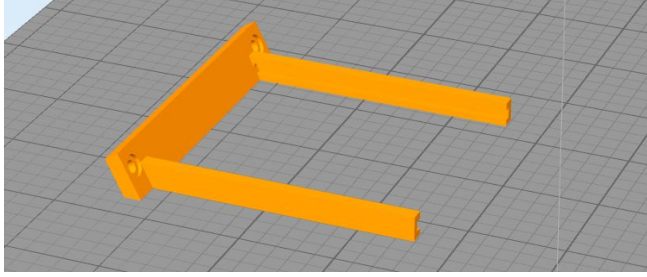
3D printed K64 mount that holds the K64 and motor shield assembly to the back of the car. Note: this was printed in orange filament for the NXP car.
